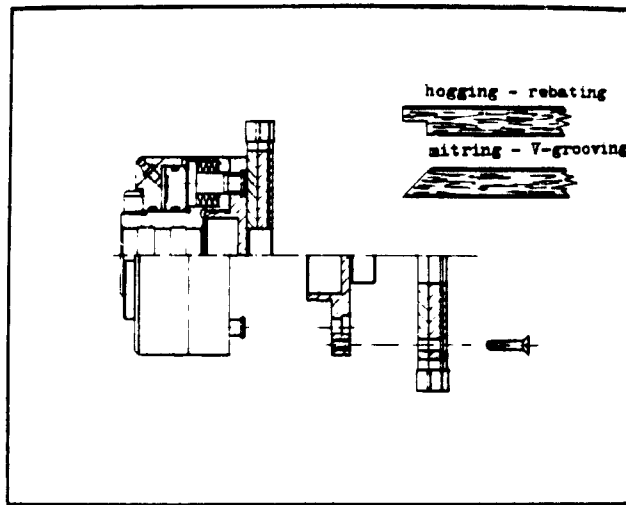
Special flange with staggered saw-grooving cutter (mini-hogger also used as V-grooving cutter).
